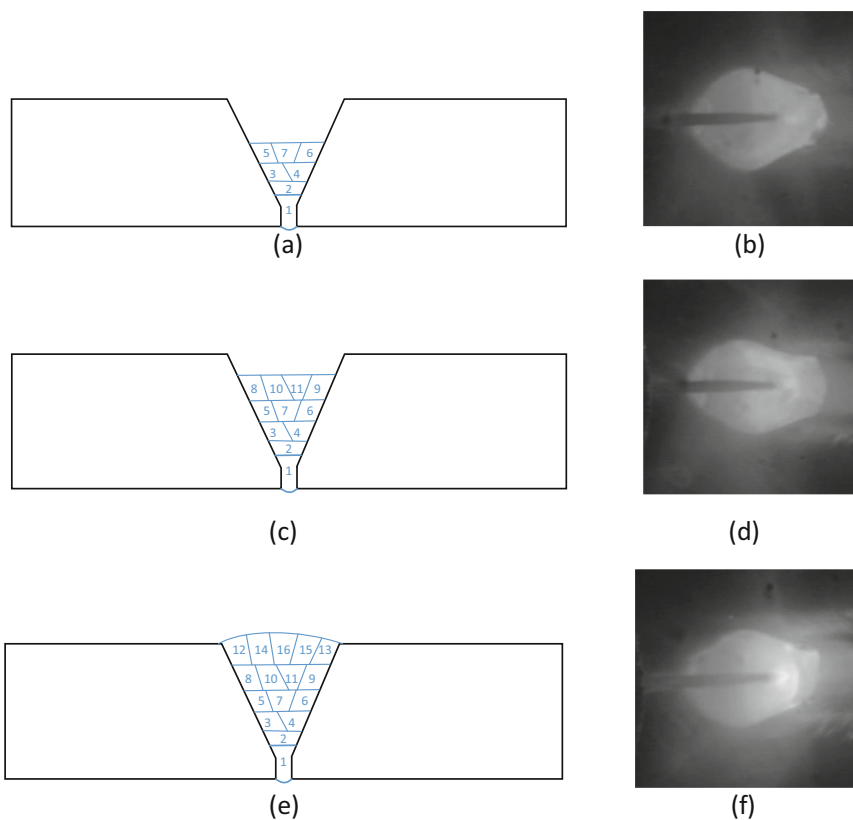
(a) (c) (e) Schematic diagram of weld bead filling. (b) (d) (f) (a) (c) (e) corresponding molten pool image.
